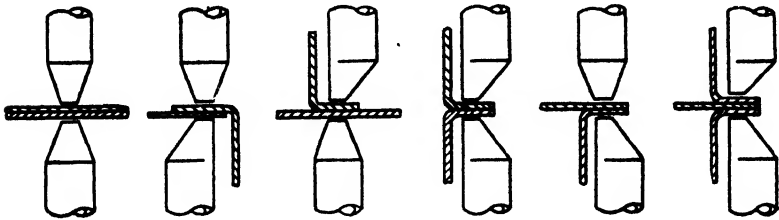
Normal position of spot welded joints to be made with standard electrodes.
